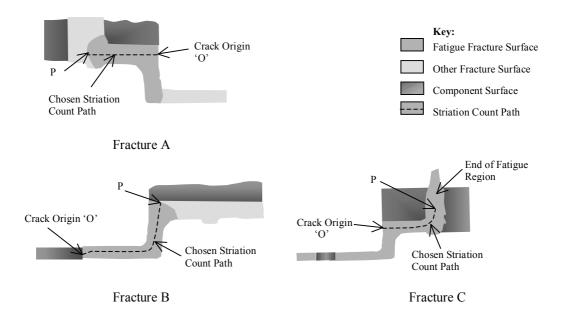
Schematic of the top view of fracture surfaces A-C (not to scale)
